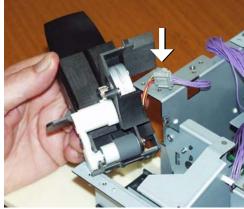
Tape Feeder Mounting Screws Figure 5-53 Tape Feeder Harness
